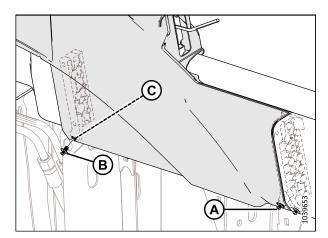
Right Outboard Linkage Cover – View from Rear of Header
